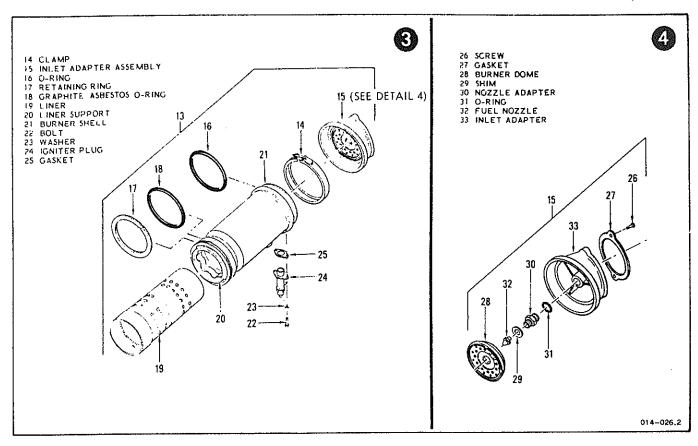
Burner Section Installation, Exploded View (Sheet 2 of 2)
